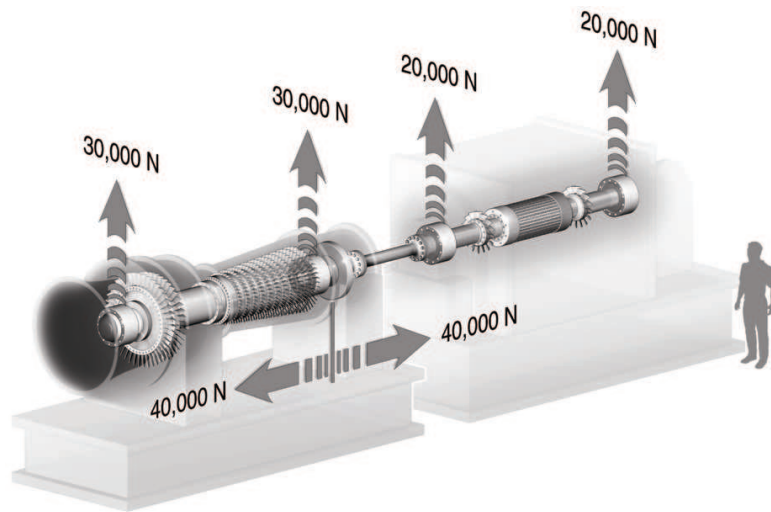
Gas-turbine/Generator for power generation: 4 radial bearings and 1 thrust bearing, 6010 rpm, 9000 kW, bearing diameter 400 mm (courtesy S2M).
